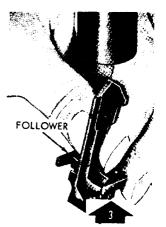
Disassembly/assembly of follower group. (1 of 2)
